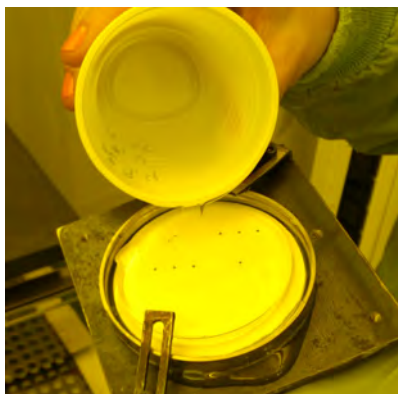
Pouring the mixture of Sylgard onto the mold metal frame.
